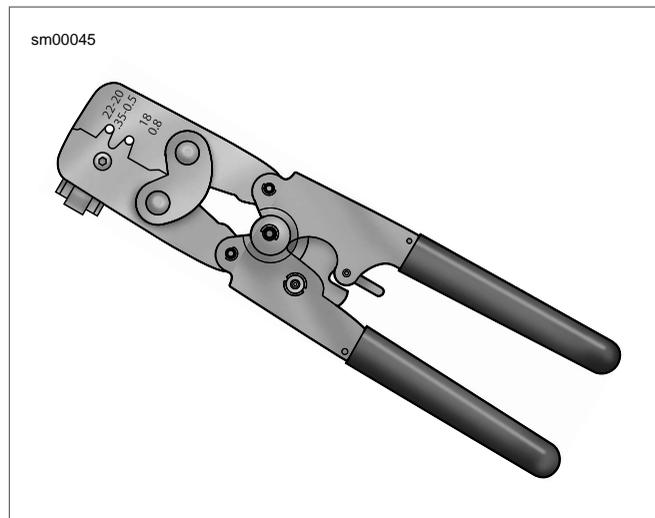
Packard Micro 64 Terminal Crimper (HD-45929)
